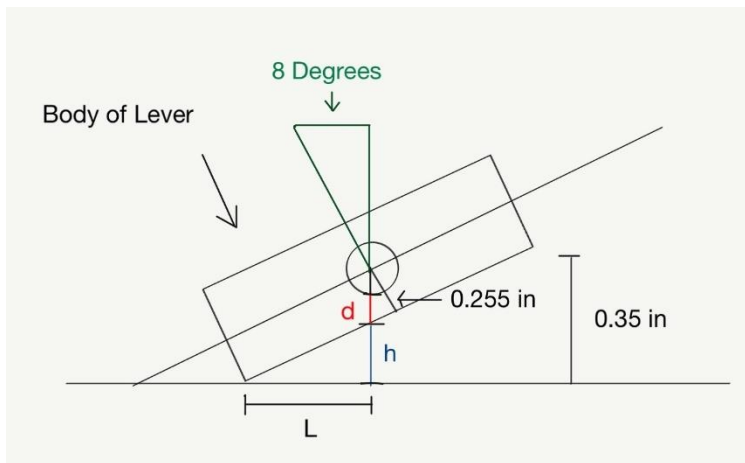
Dimensions Used to Calculate New Length of Motor Base
